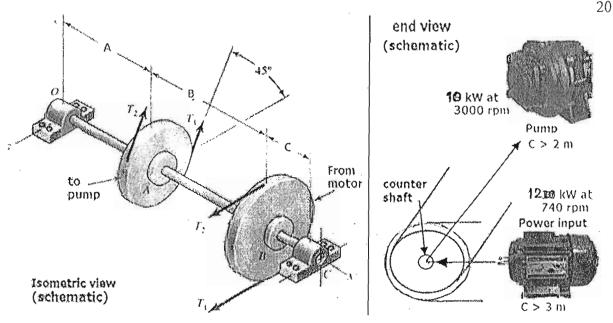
A counter-shaft transmitting power from a motor to a pump
